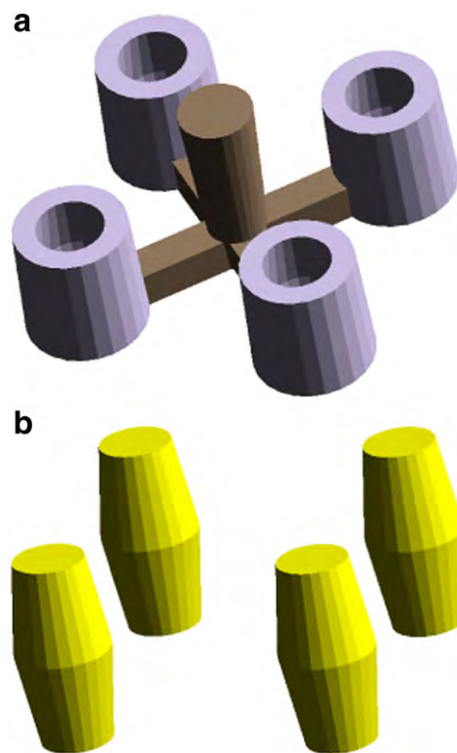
3D-CAD-Model of casting layout (a) the casting with Down sprue and runners (b) the cores.
